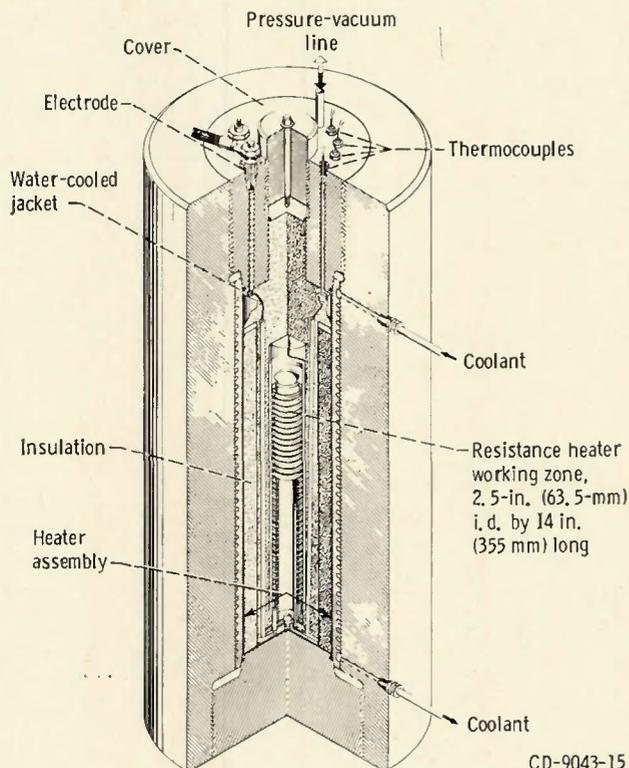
Cold-wall autoclave used for hot-isostatic-pressure welding
